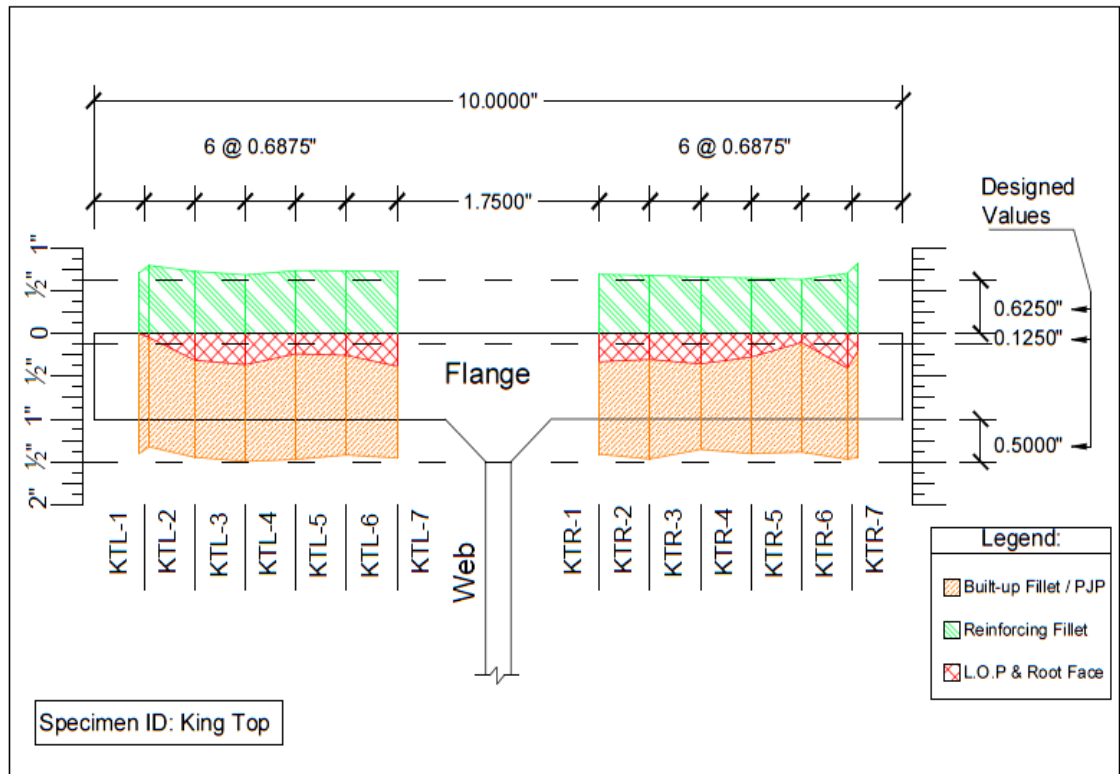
KT- Cross Sectional Weld Penetration View
